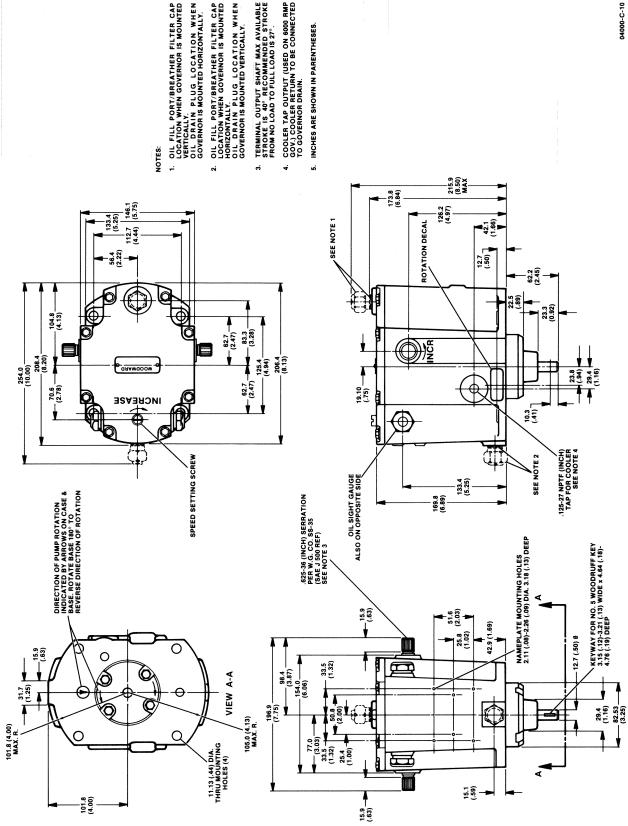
TG-13/TG-17 Outline Drawing Screw Speed Setting. Die-Cast Aluminum Case. Do Not Use For Construction
